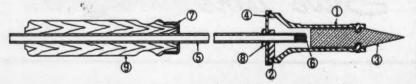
Cross Section Drawing of "Home Made" Gas Soldering Iron
